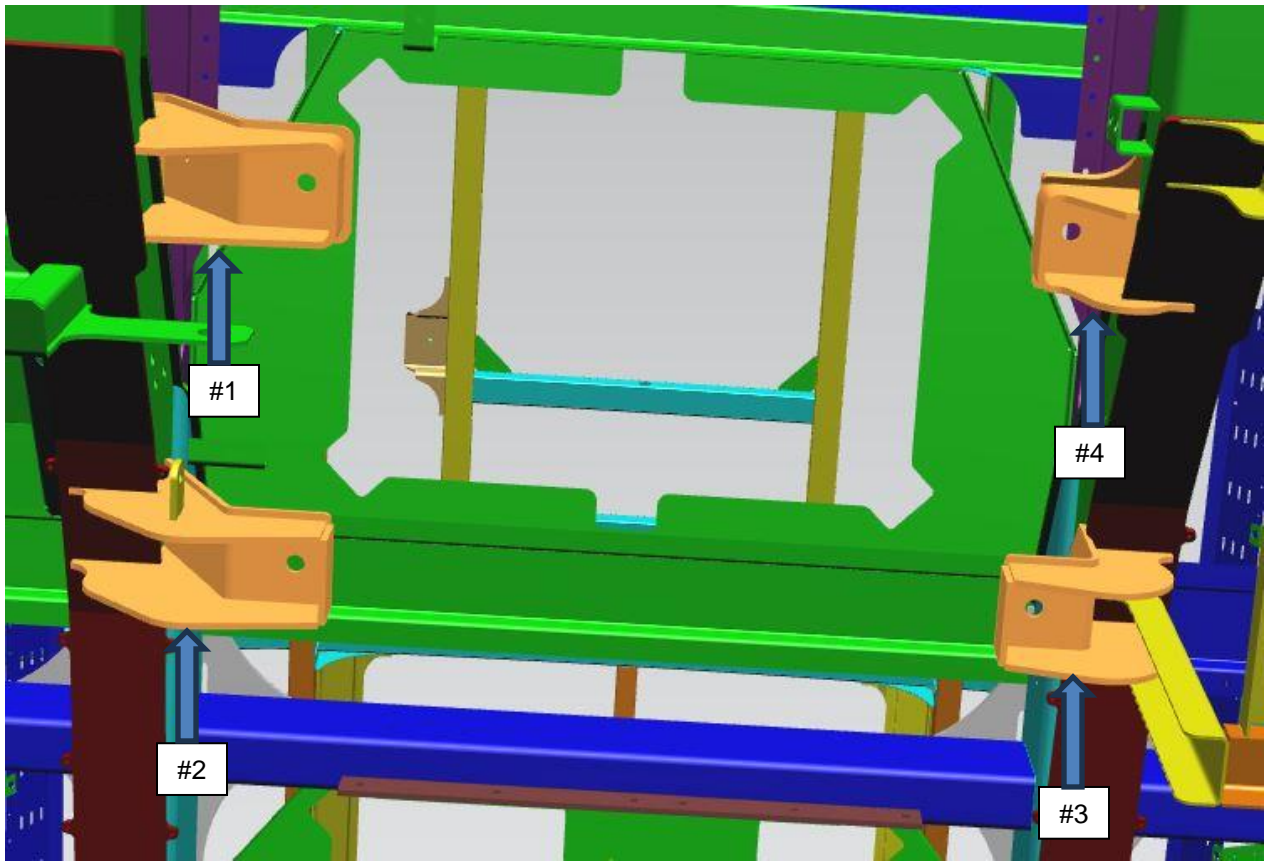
SHOWN AREA TO BE INSPECTED ON REAR CHASSIS (FROM UNDER THE BUS)
